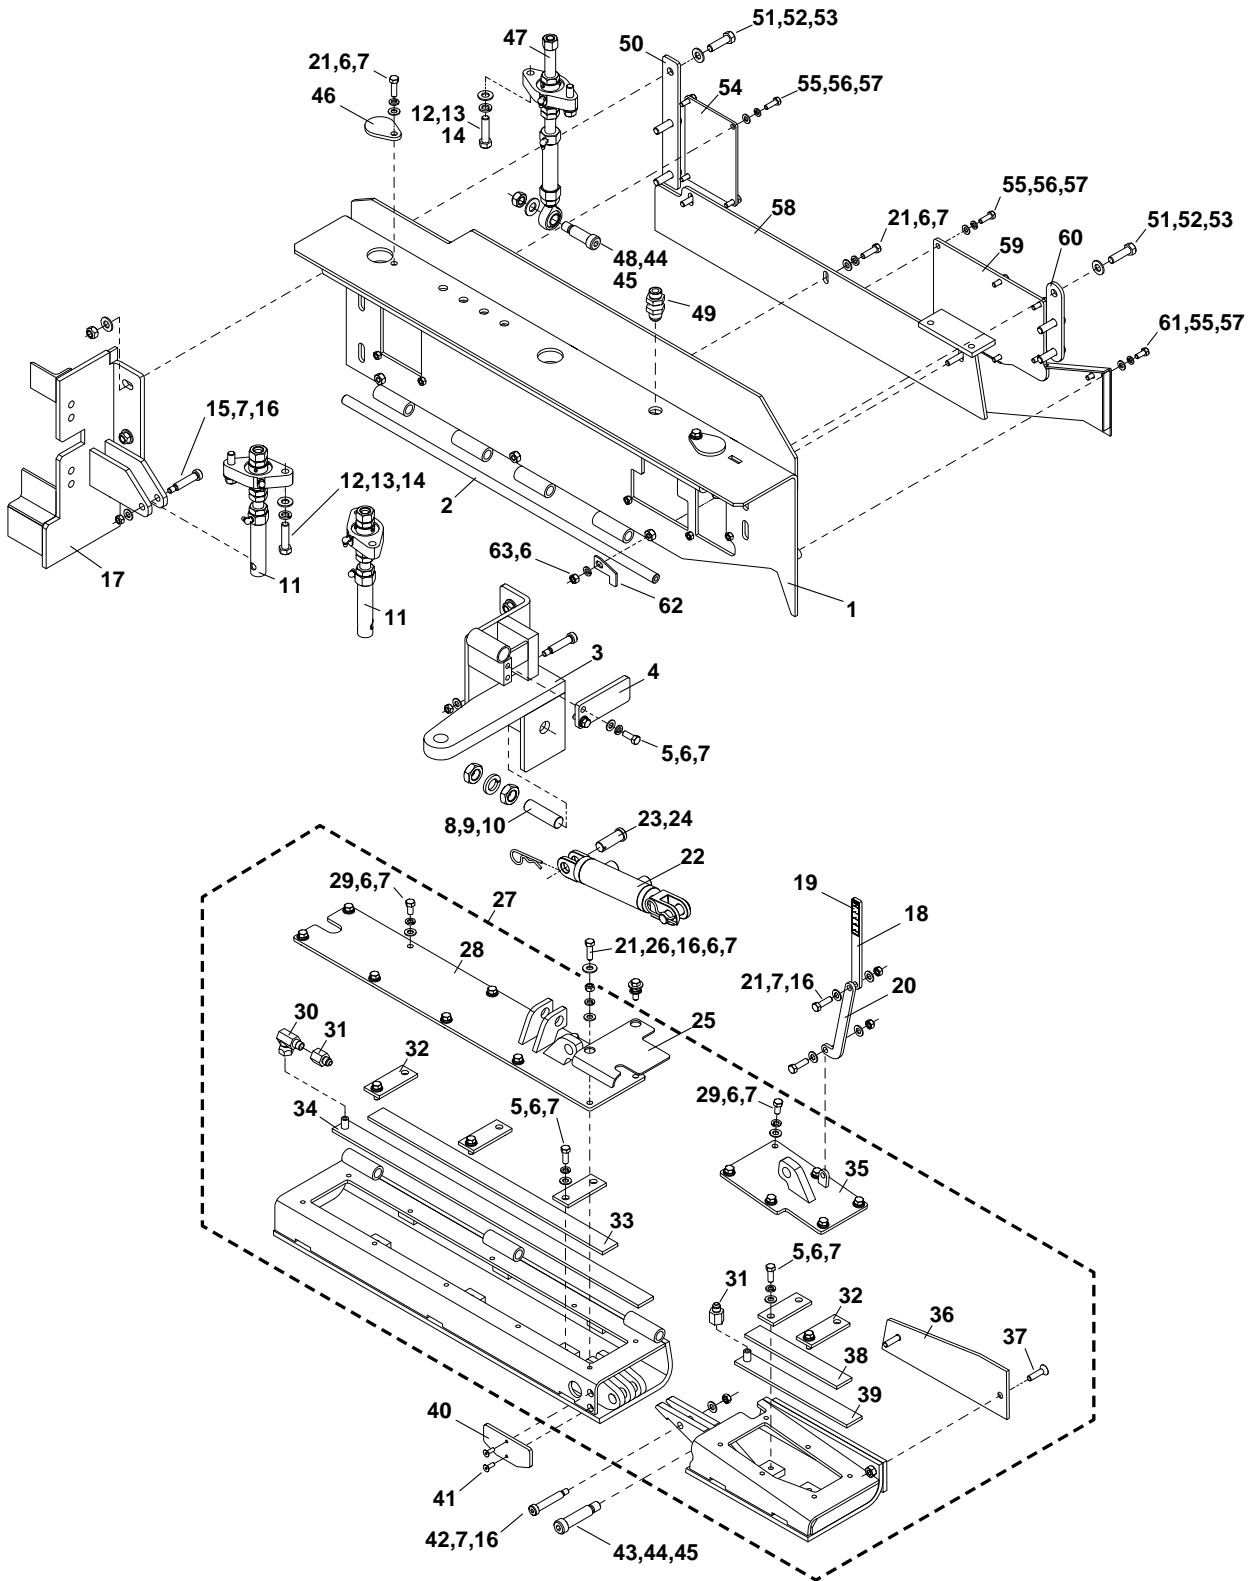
Option - HD Berm Screed Extension Assembly - Right (1 of 2)
